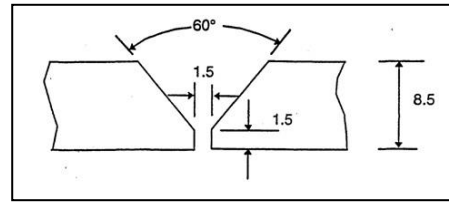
API joint preparation for pipeline welding all dimension in mm
